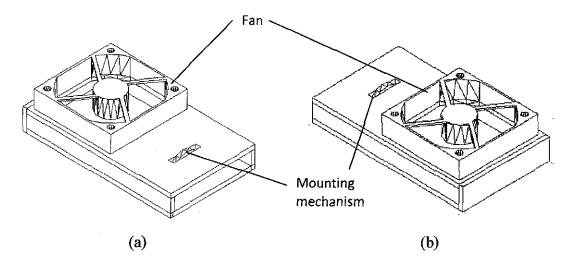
The exhaust blower (a) SE Isometric (b) NW Isometric.
